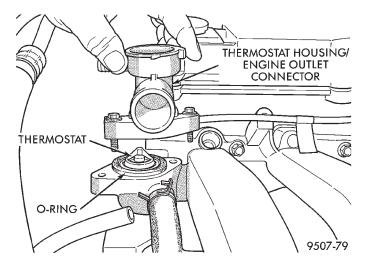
Thermostat and Engine Outlet Connector— 2.4L Engine
